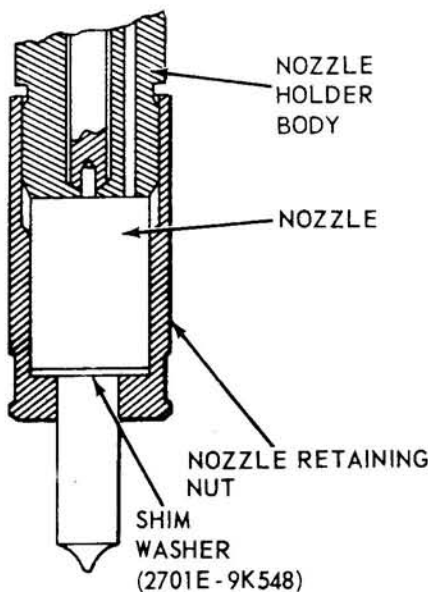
A shim washer (part No. 2701E-9K548) installed between nozzle and retaining nut will help in preventing dowels from being sheared as nozzle retaining nut is tightened.
